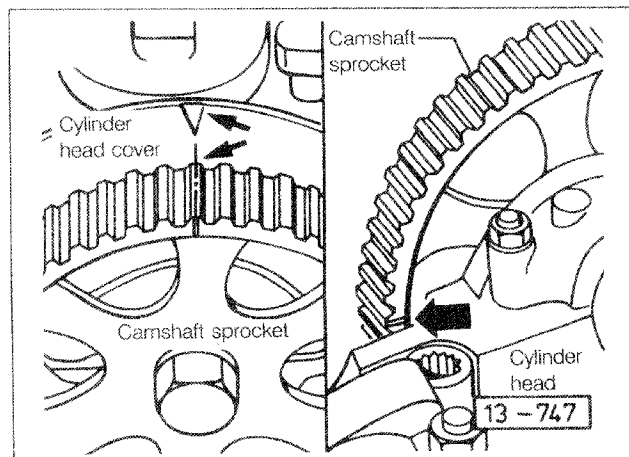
Camshaft timing marks on PL (16-valve) engine with cylinder head cover on (left) and off (right).
